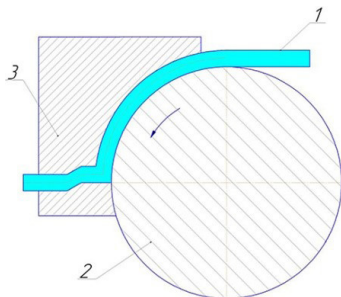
Scheme of Multi-ECAP-C: 1 – billet; 2 – driving wheel; 3 – fixed clamp [8].
